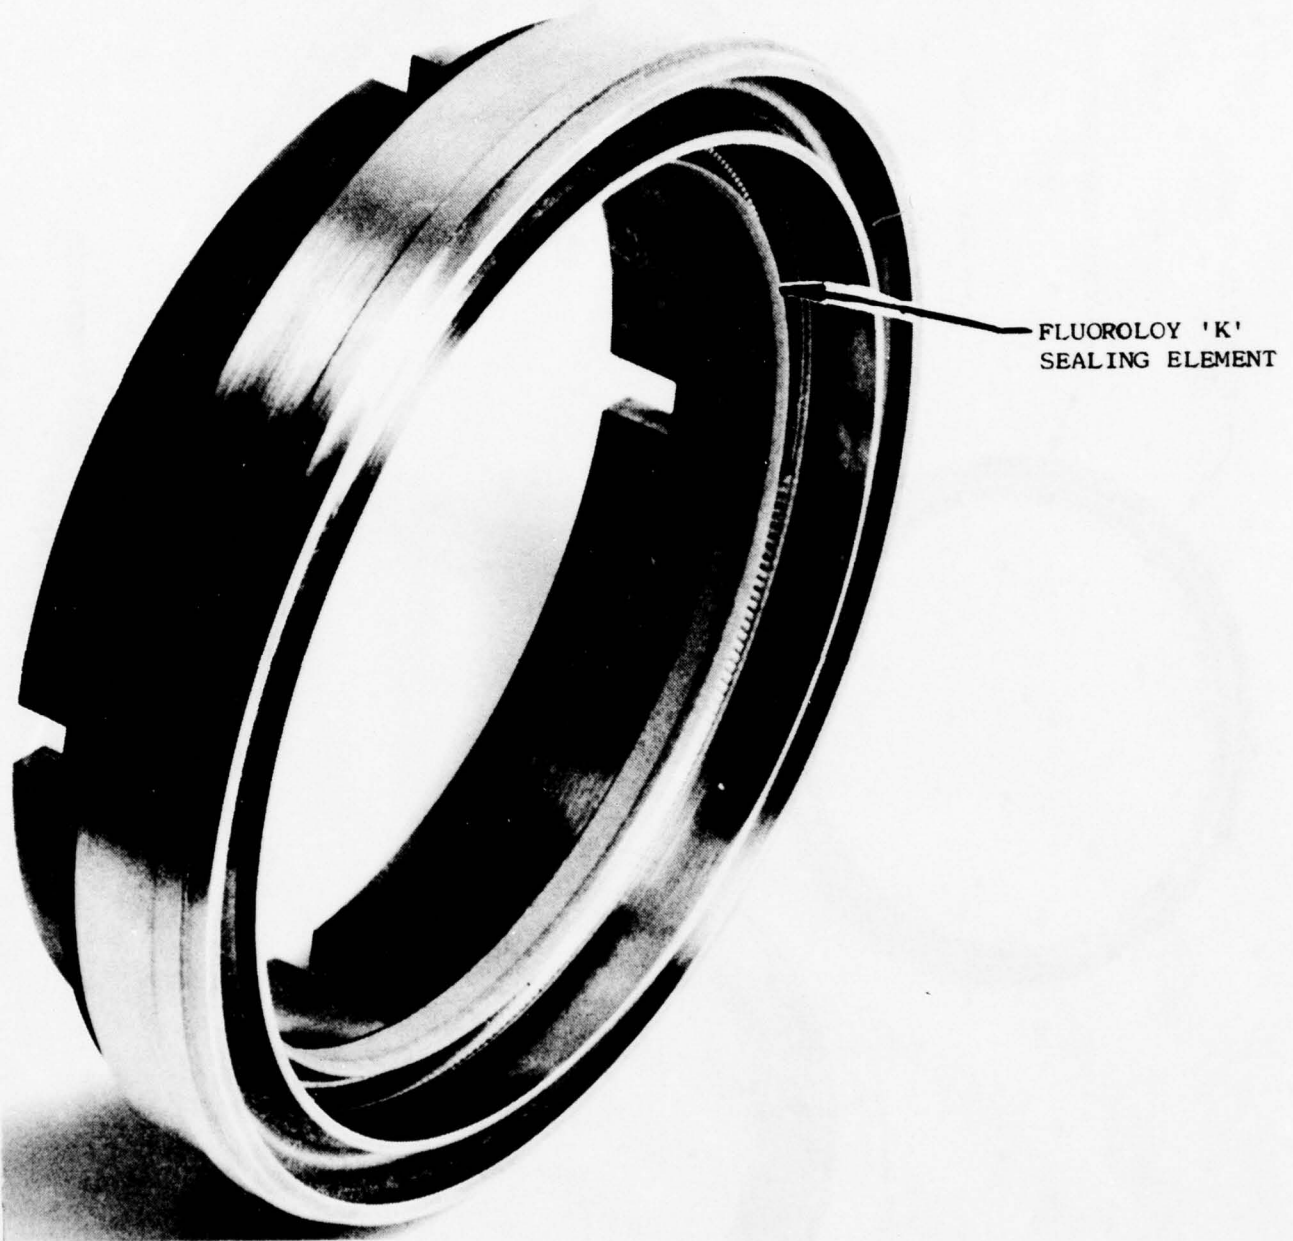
Rotary Shaft Seal Assembly, Lip Type Seal
